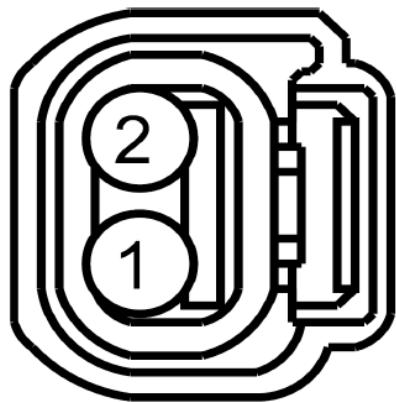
Coil On Plug 4 Connector End View (C1541)
